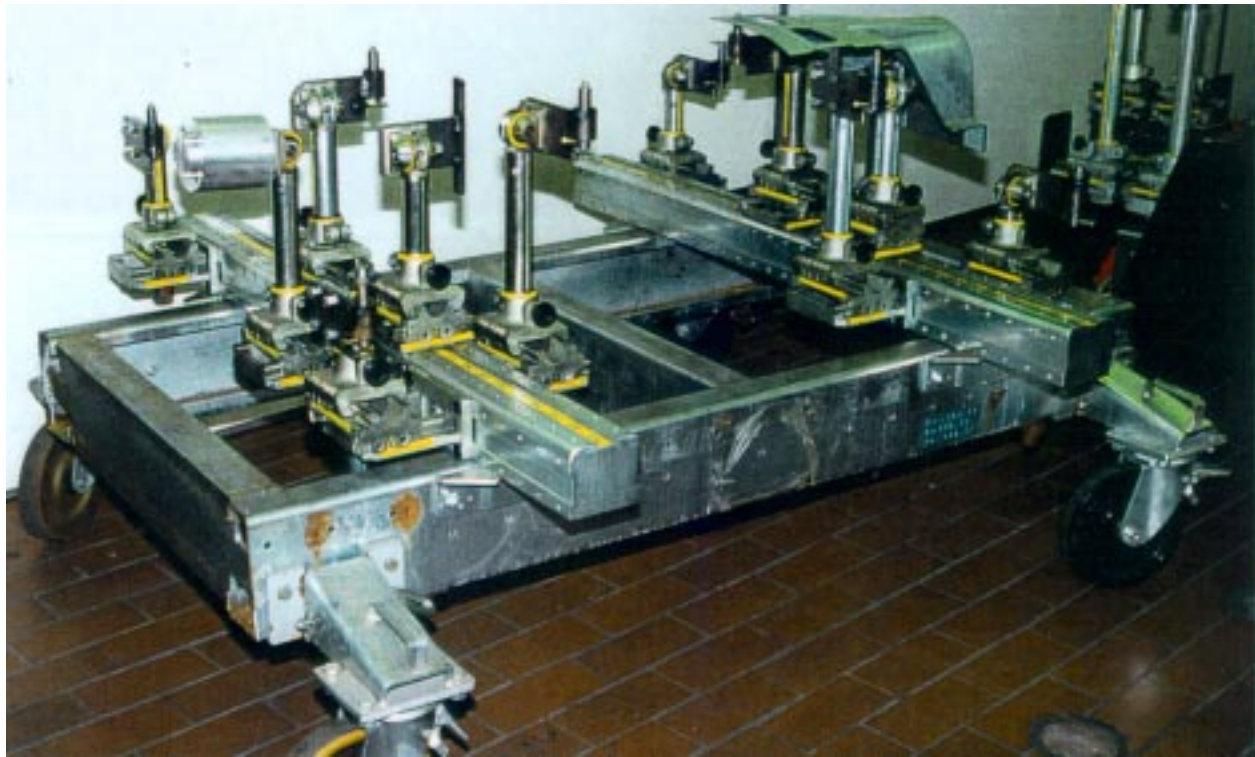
Mobile Assembly Fixture - Shock Tower Front SubAssembly RH/LH
